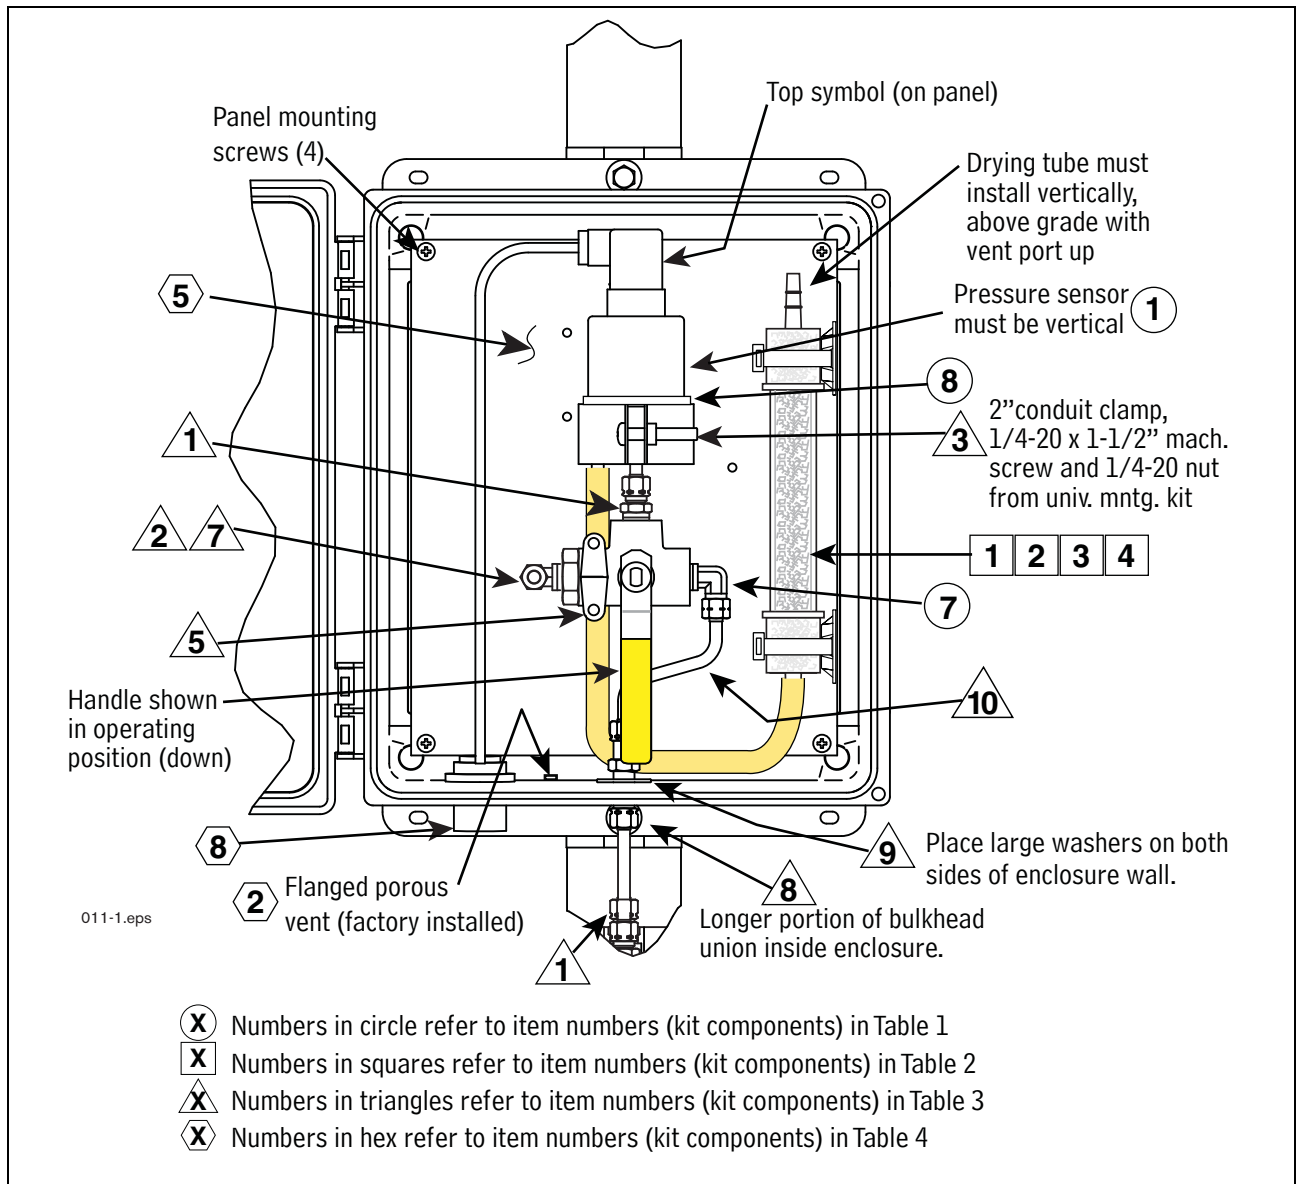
Mounting Pressure Sensor Assembly onto Composite Panel
